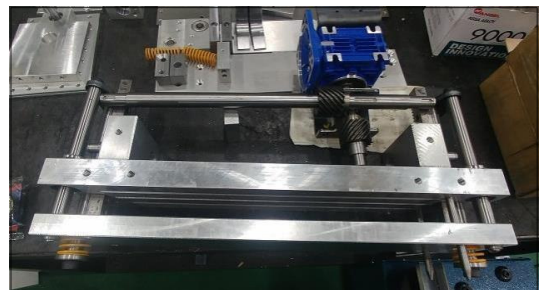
Fastening part of adhesive wireless bookbinding machine
